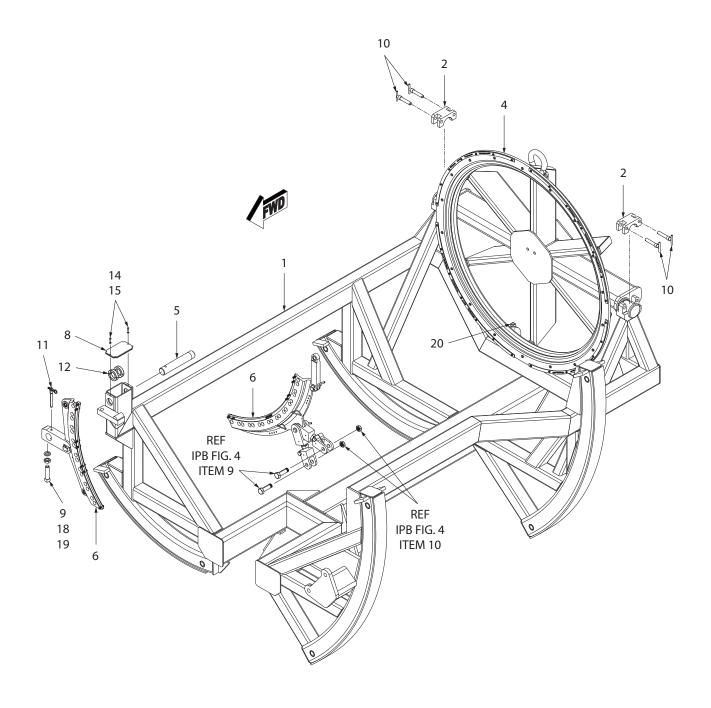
AGSE-E18406-S01 Cradle Assembly
